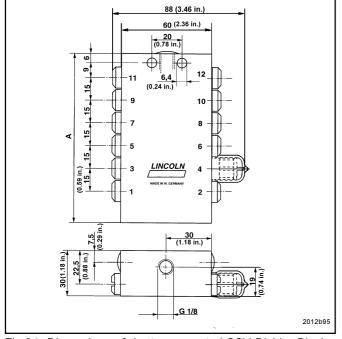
Dimensions of bottom mounted SSV Divider Blocks
